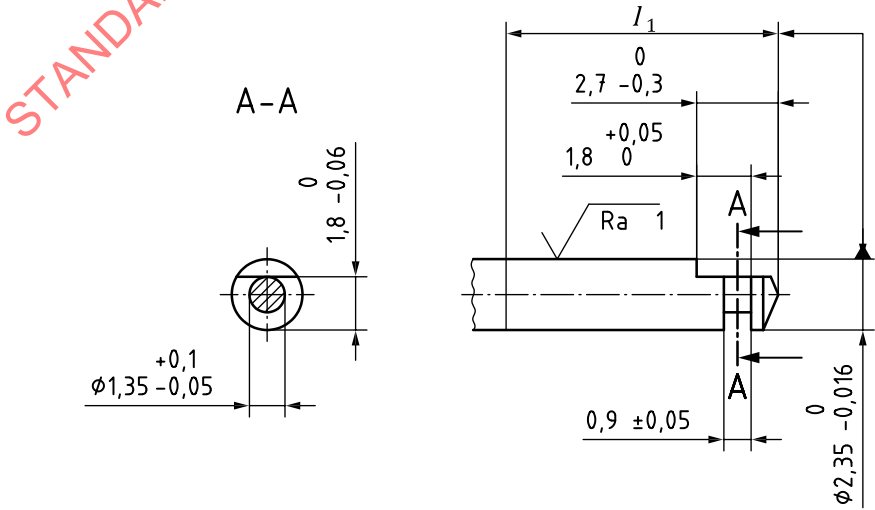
Dimensions, tolerances and surface roughness for Type 1 shank
